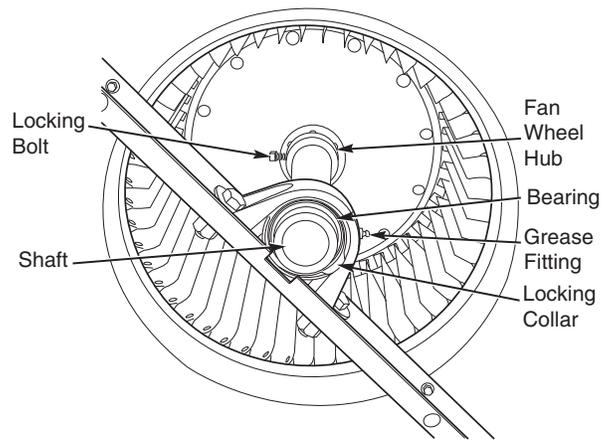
Fan Shaft, Bearings, and Fan Wheel (Typical)
